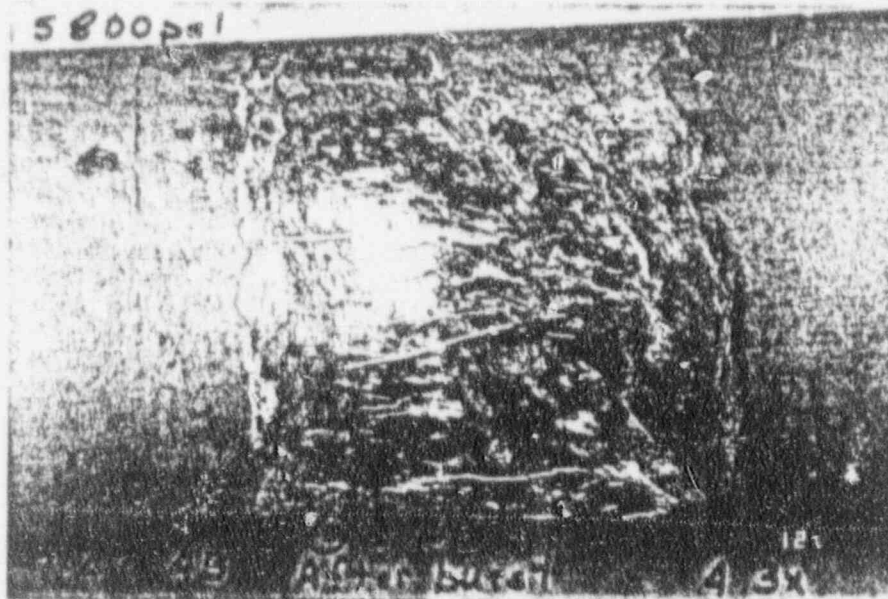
Catawba-1 Pulled Tube R10C69, TSP-3: Crack Opening After Burst Test
